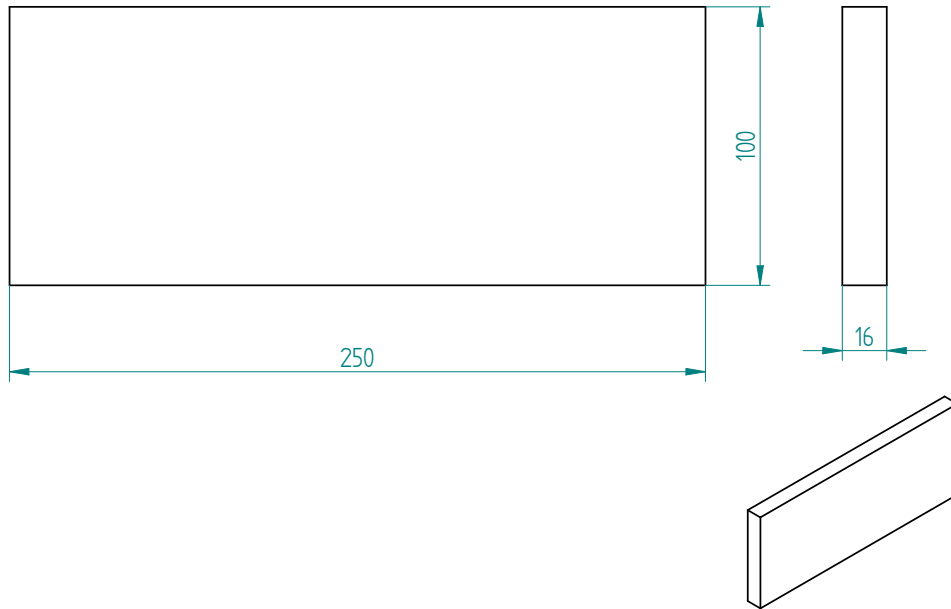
Shaped part : face-1-outsourcing for perpendicularator tool
